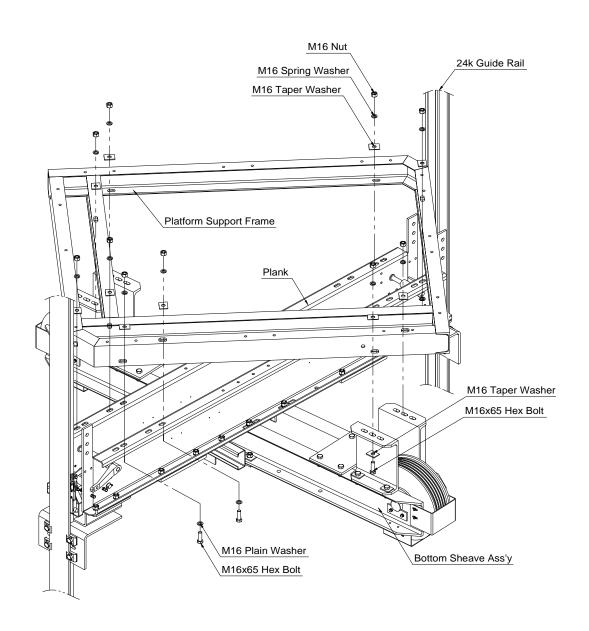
B. PLATFORM SUPPORT FRAME INSTALLATION (Underslung Corner post type)
